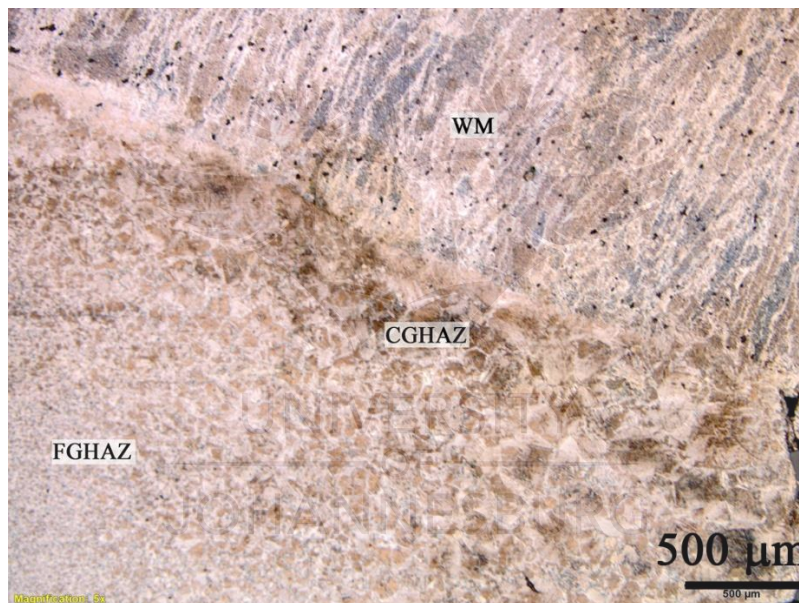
Weld zones of the unreinforced butt joint
